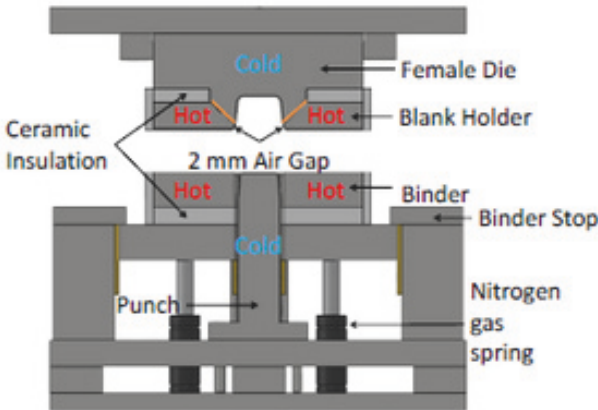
shows a hot stamping experimental mold with two nitrogen gas springs [6].
